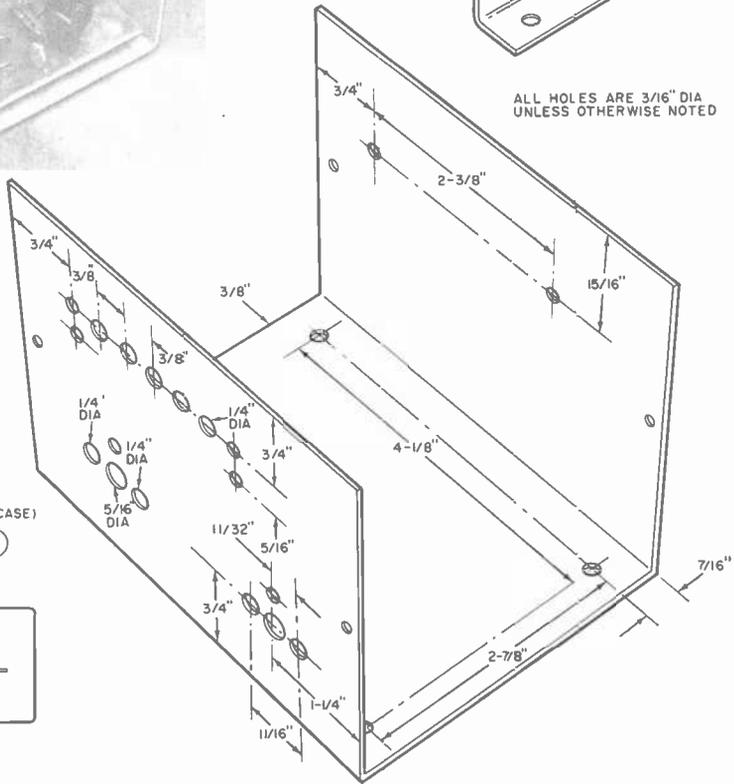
Locate and drill all holes accurately. Large 1" hole is for screened air vent. Size and spacing of holes for terminal strip can vary. Mounting sequence is: Q1, Q2, terminal strip, completed board, and bathtub capacitor. Transistors must not touch the cabinet.
